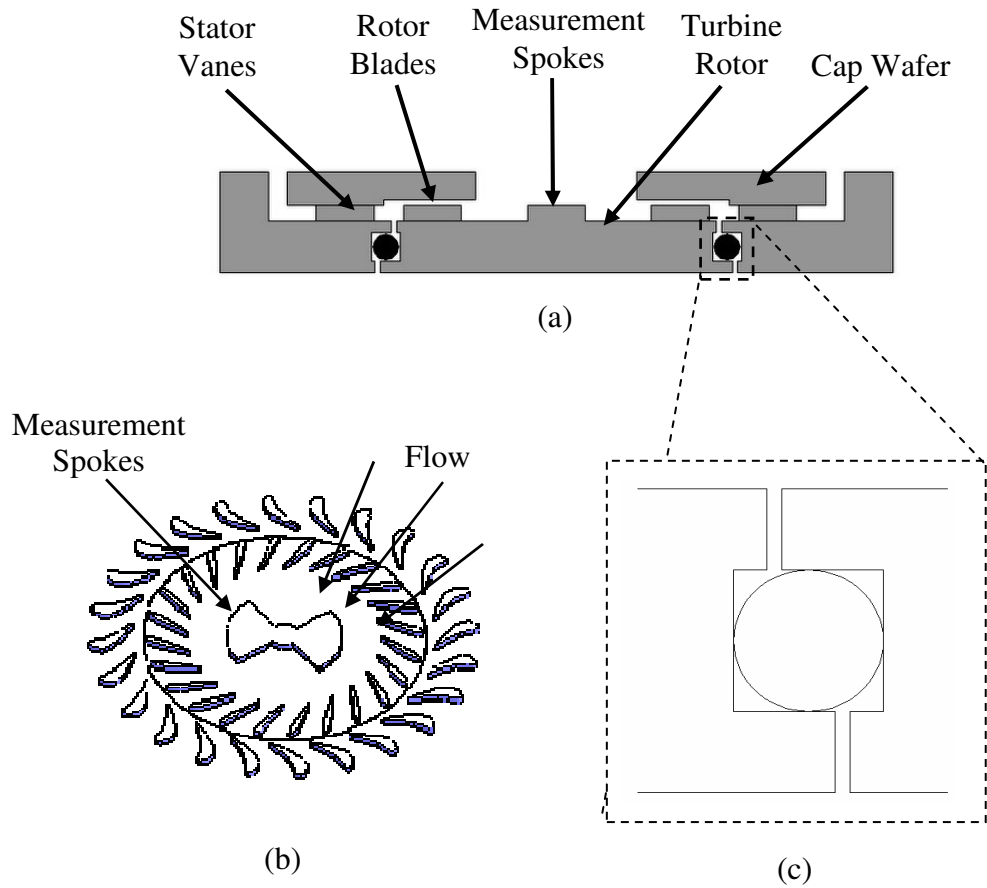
Illustrations showing: (a) cross-sectional view of the radial in-flow turbine supported by the encapsulated microball bearing; (b) radial in-flow air turbine design; and (c) planar-contact bearing orientation.
